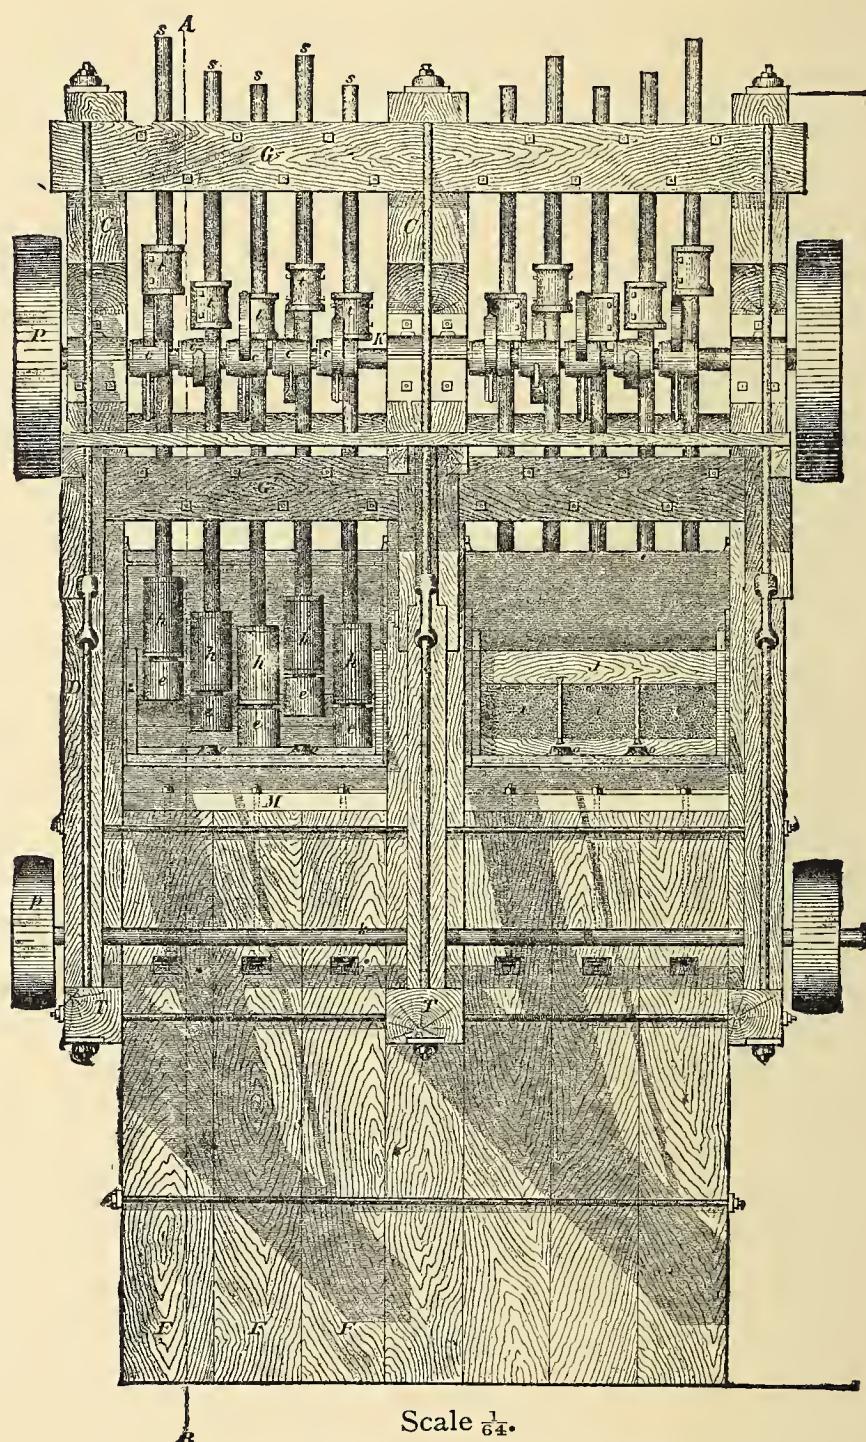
FRONT ELEVATION OF 10-STAMP BATTERY.
